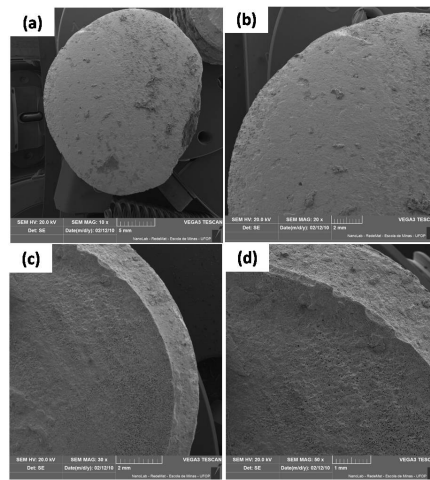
Fracture surfaces of A (c e d) e B (a e b) screws - SEM.
